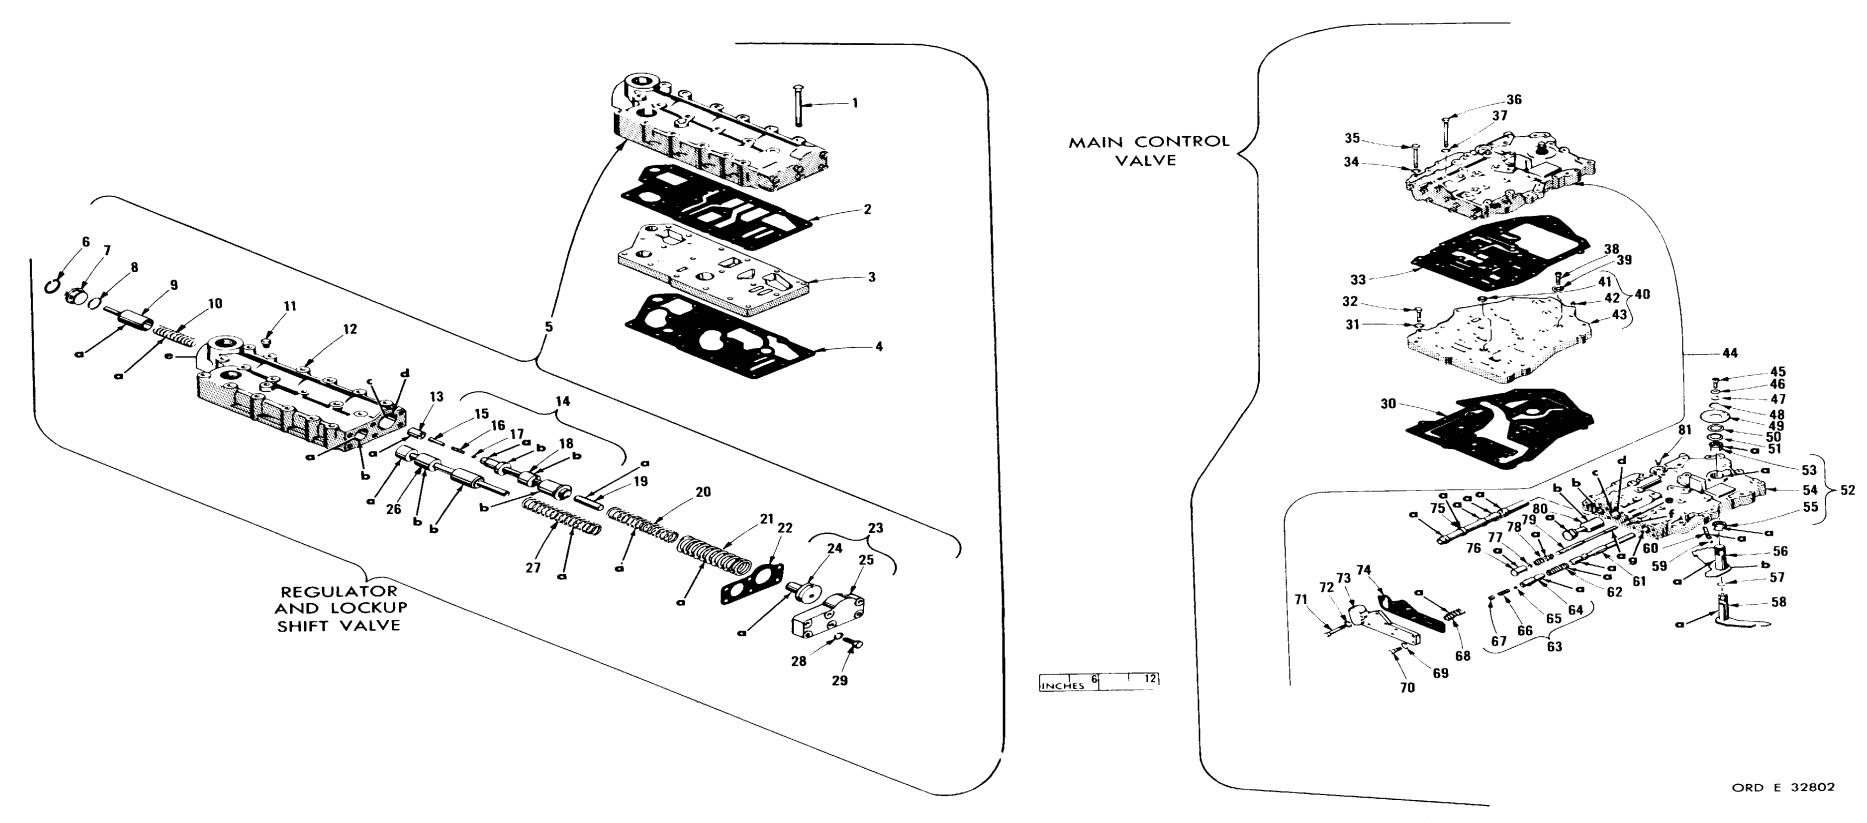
Fold-out 12 -- Main-pressure regulator and lockup shift, and control value body assemblies exploded view
